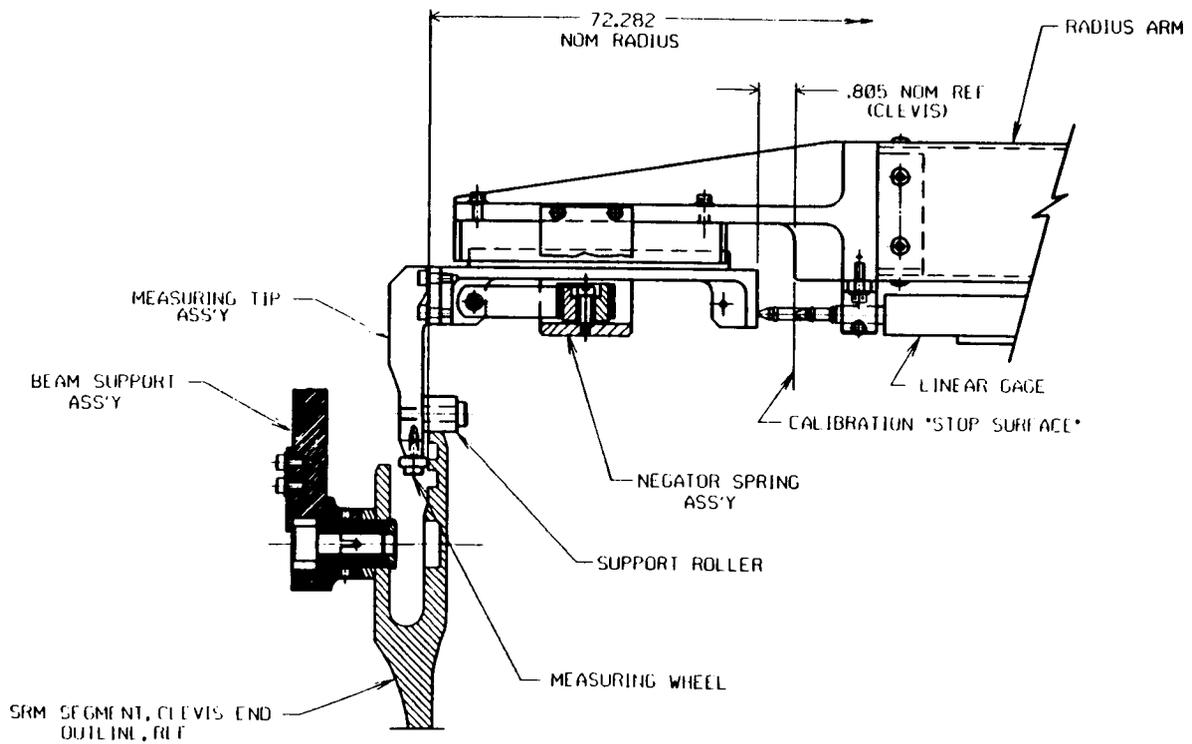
SRM Profile Measuring Tool, 97M50380-5,
